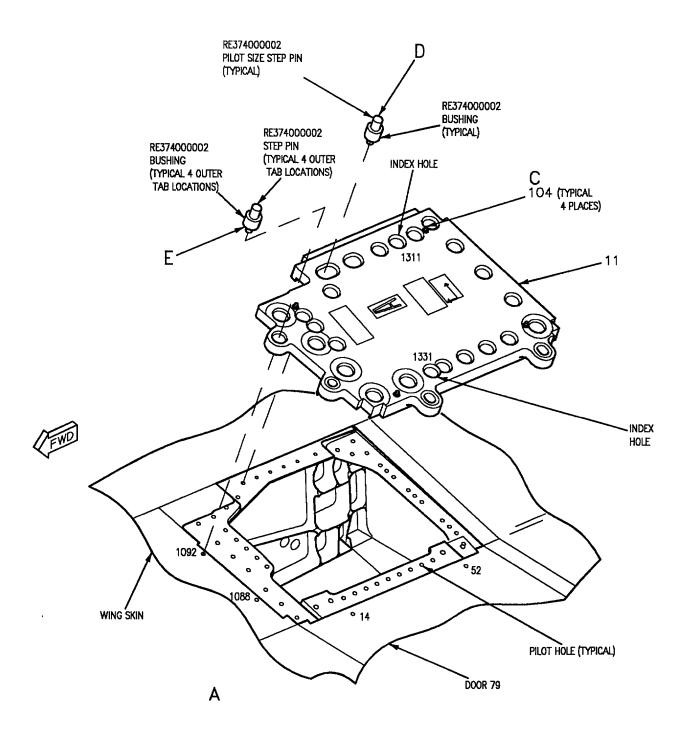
Installation of Plate Set for Drilling Door 78 and Substructure (Sheet 1)
